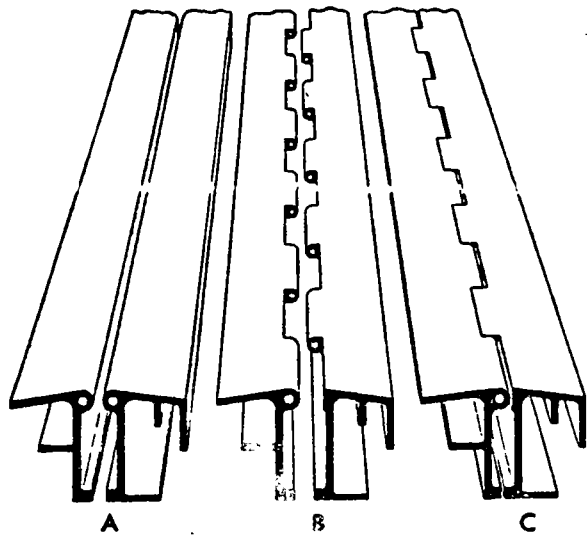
Extruded hinge sections are frequently employed in aircraft design. A, sections as extruded; B, machined; C, assembled.
